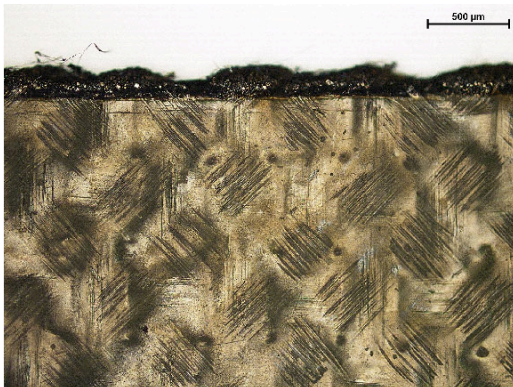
Edge of 3 mm wide, laser cut laminate without visible defects.
